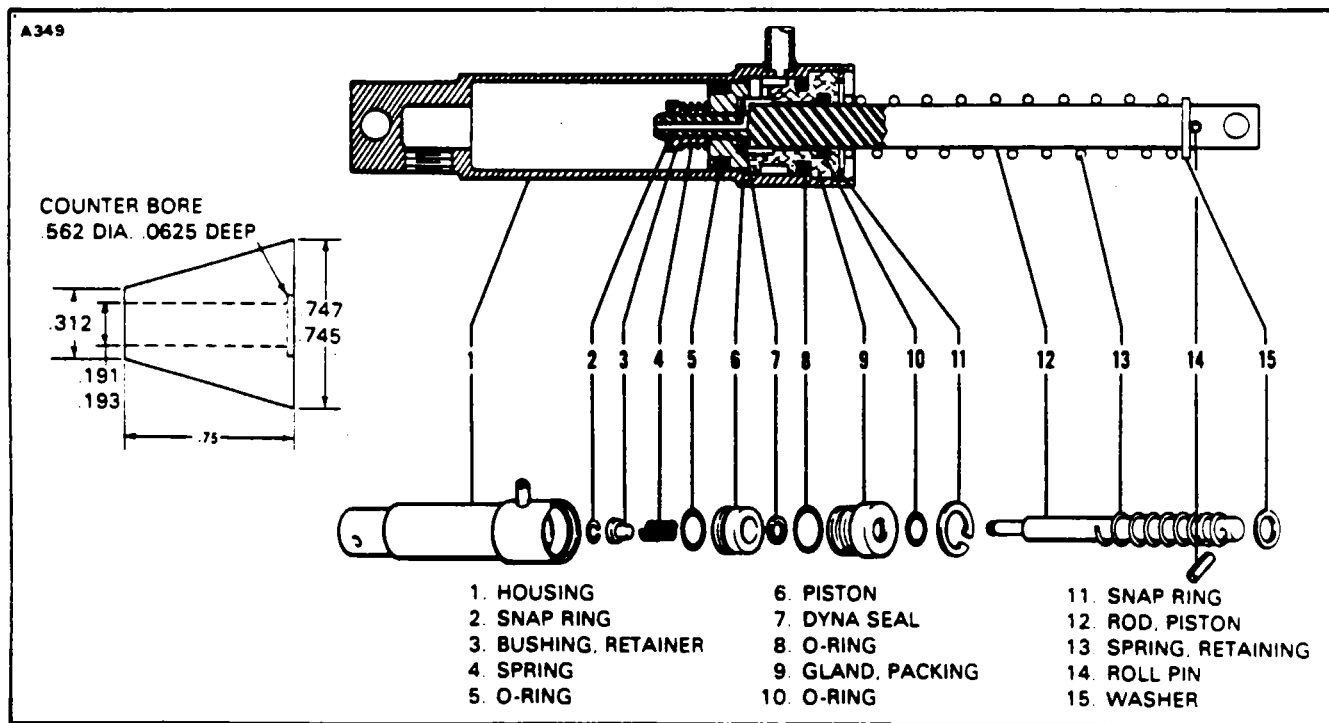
Brake Master Cylinder (Hand Parking Brake)
